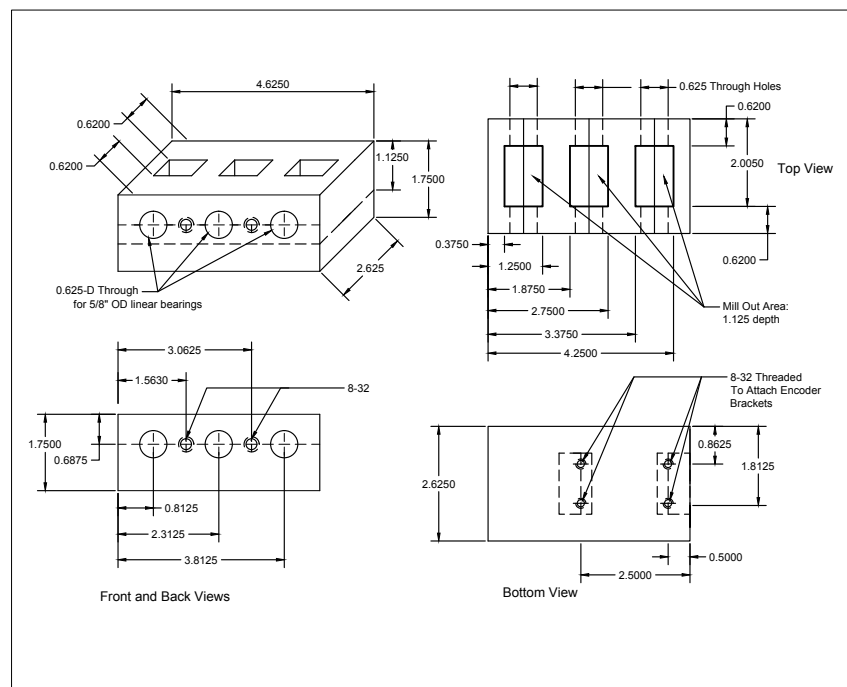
Mass  $M_1$  made of aluminum, designed to hold 6 linear ball bearings, support the pendulum, and attach the spring
